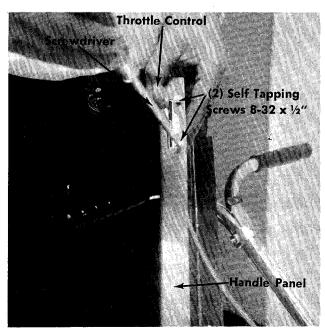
THROTTLE ASSEMBLY TO PANEL
